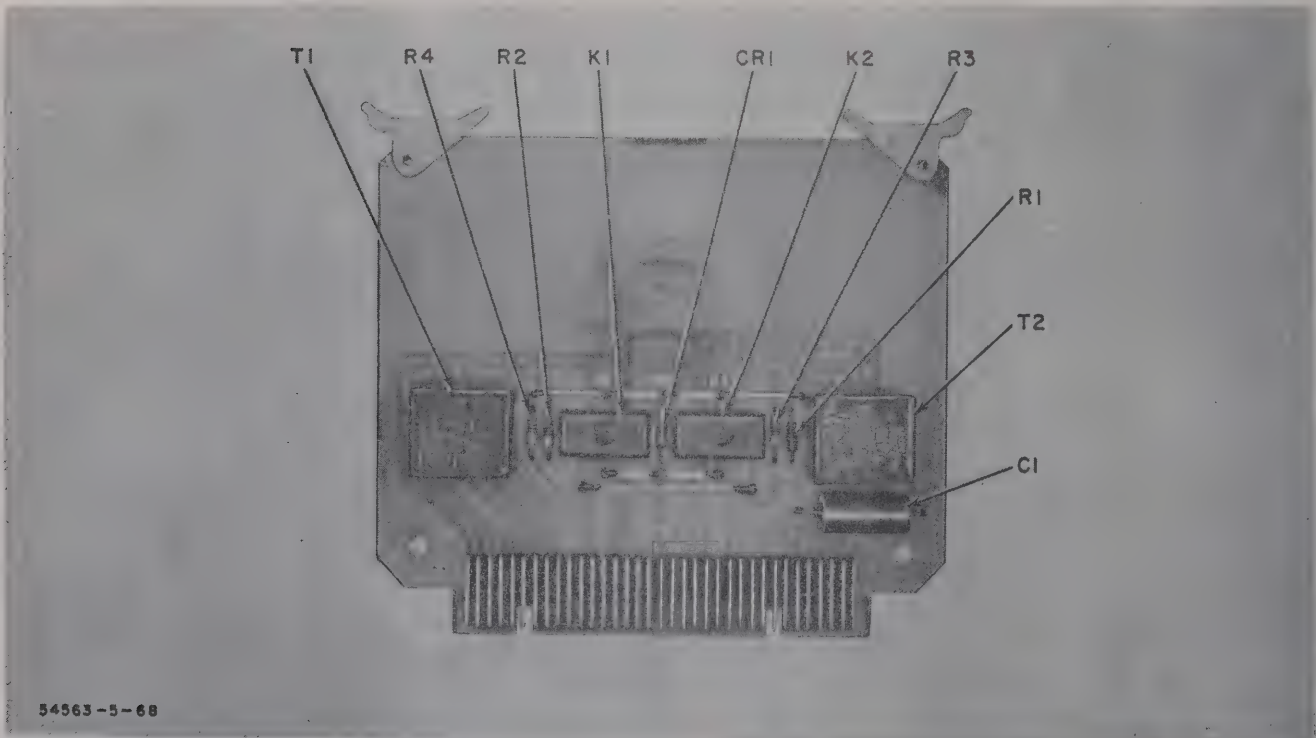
Transformers and Control Relays Printed Wiring Board A4,
